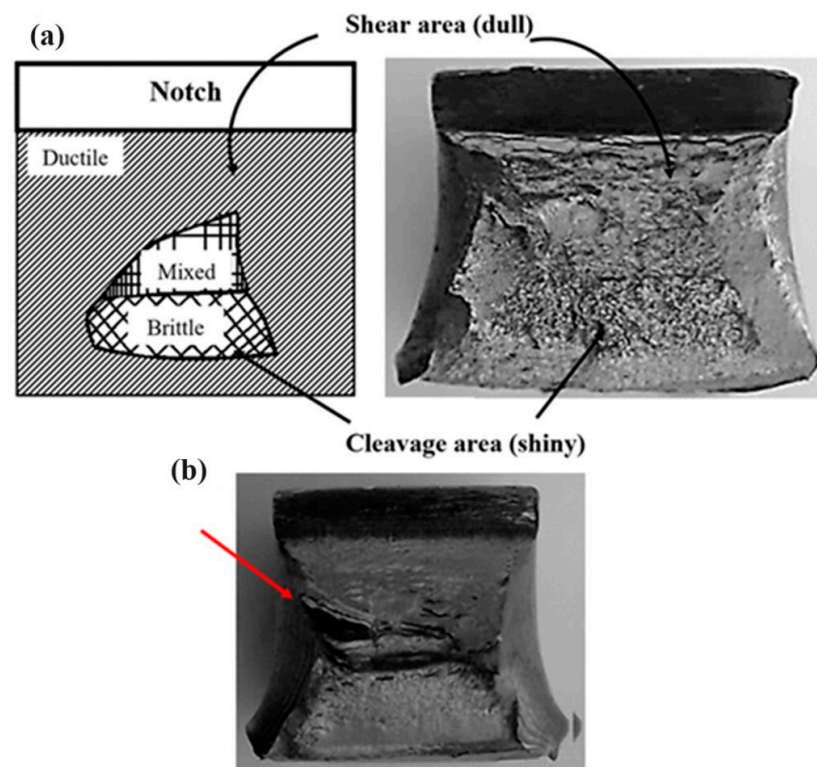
Fracture surfaces of Charpy impact specimens at different orientations.
